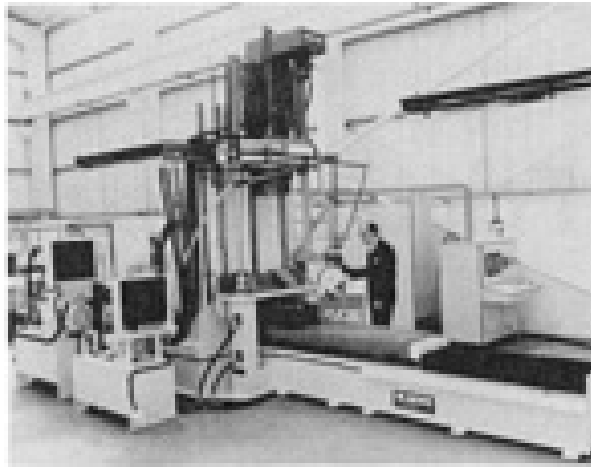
COMMERCIAL FRICTION-SURFACING MACHINE. COURTESY OF BLACKS EQUIPMENT LTD.
